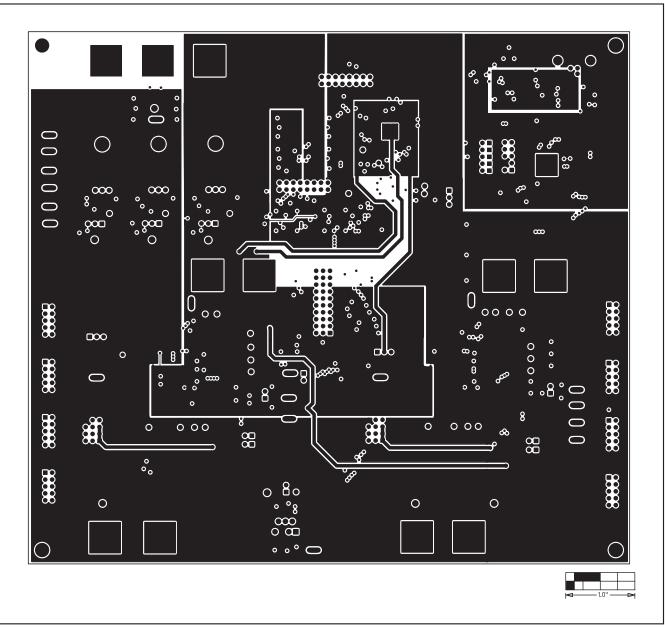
MAX9959 EV Kit PCB Layout—3rd Layer
